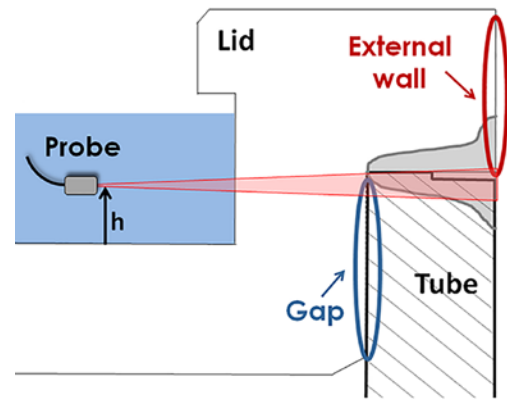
Ultrasonic investigation of the welding area between lid and tube of a copper canister. The probe is kept at a fixed height "h".
